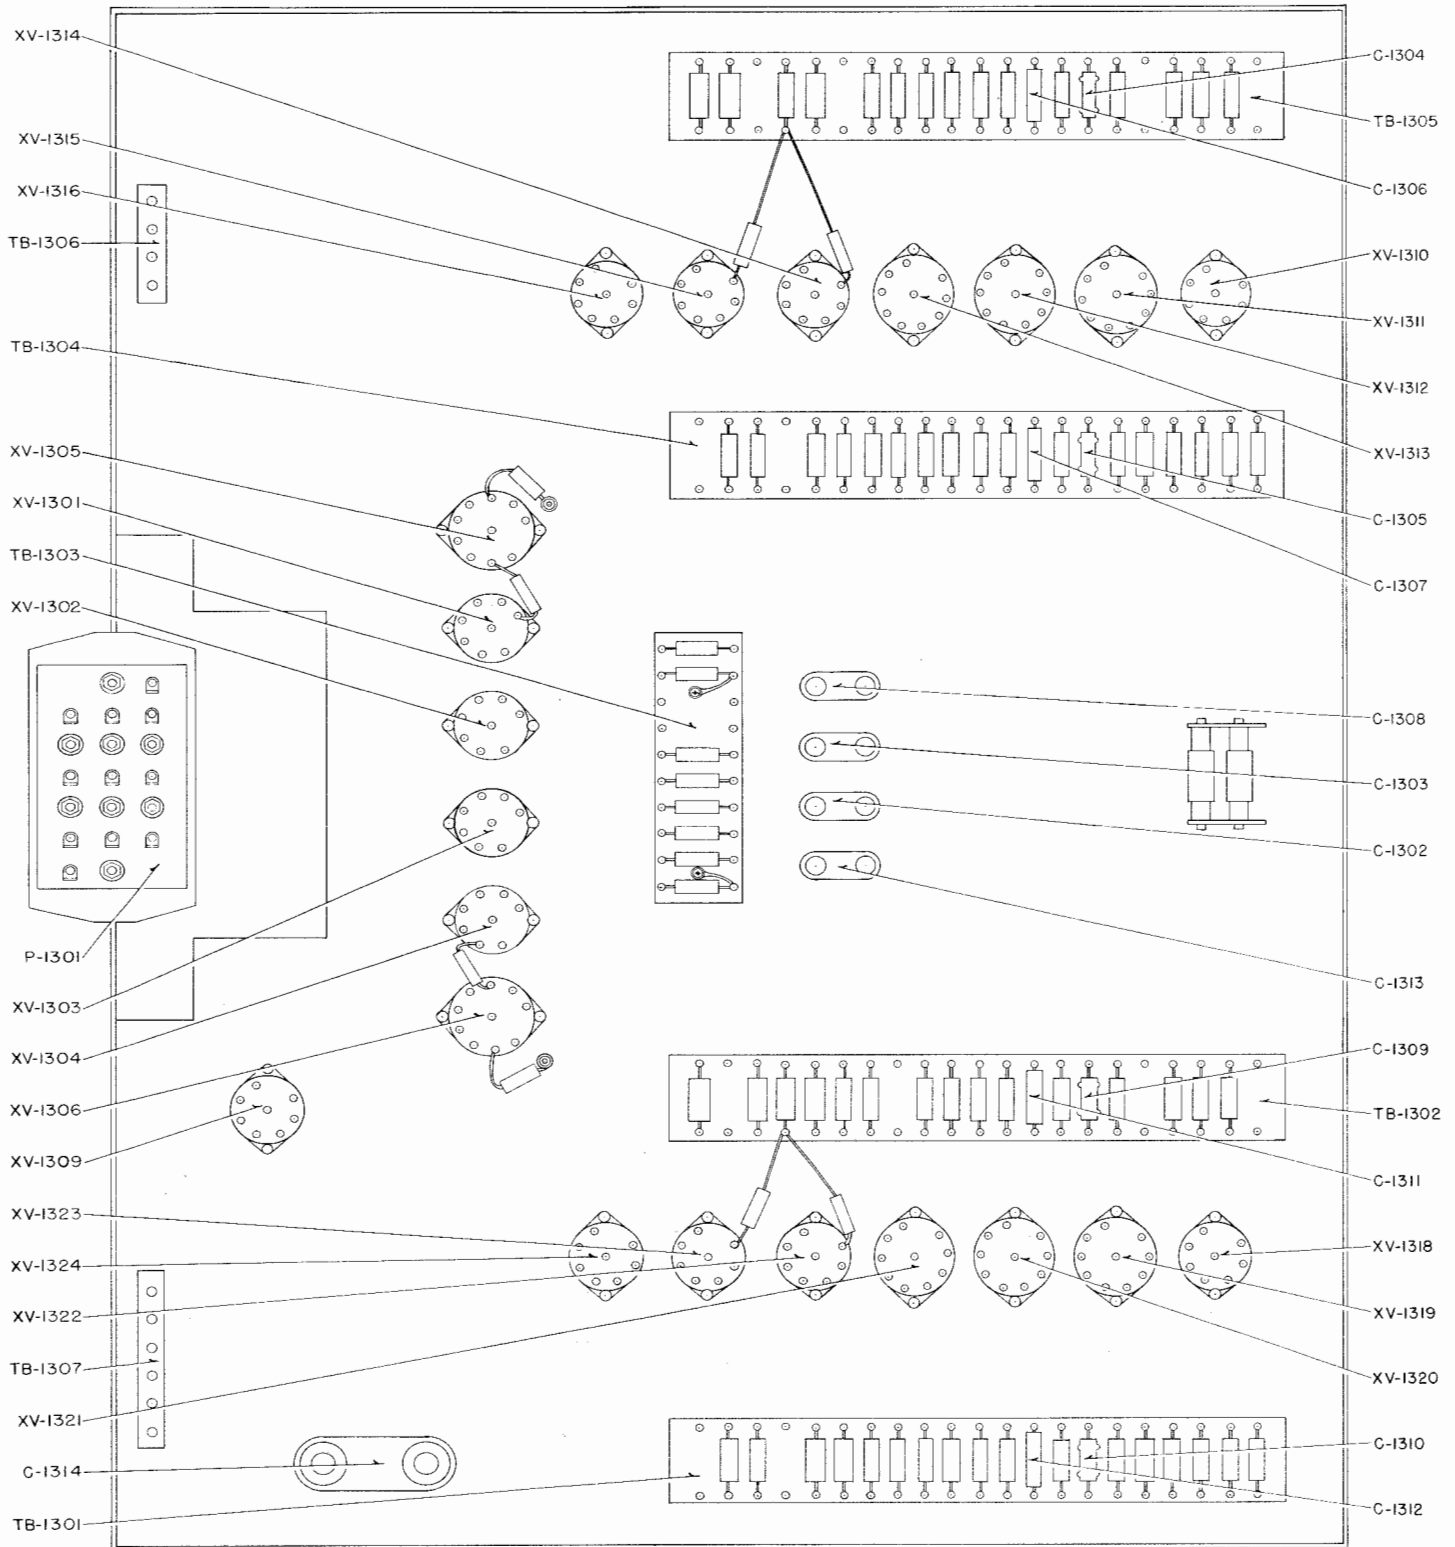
Miscellaneous Component Locations, Bottom of Chassis, Comparator Keyer CM-32/FRR-24
